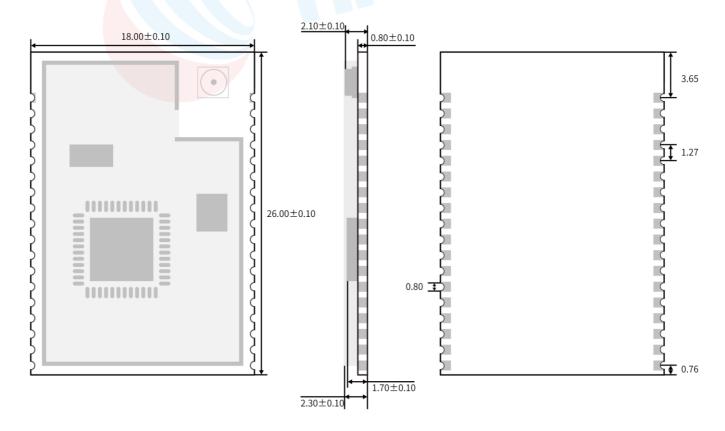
Recommended PCB Footprint of RF-SM-1077B2 (mm)
